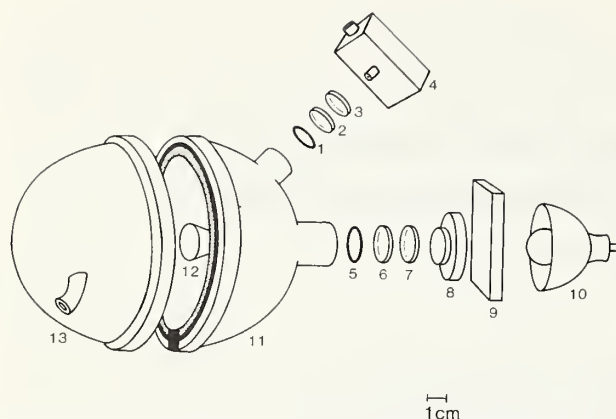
Exploded view of the integrating fluorometer probe. (1) rubber O ring, (2) CS 7-59 filter, (3) CS 2-64 filter, (4) optical detector assembly, (5) O ring, (6) CS 4-96 filter, (7) CS 3-71 filter, (8) photographic shutter, (9) heat absorbing filter, (10) Sylvania EFP (100 W, 12 V) projector lamp, (11) supporting hemisphere (it supports the light and detector assembly and is fitted to a stand), (12) dispersion cone, (13) detachable hemisphere. (Reproduced from Toivonen and Vidaver, 1984).
